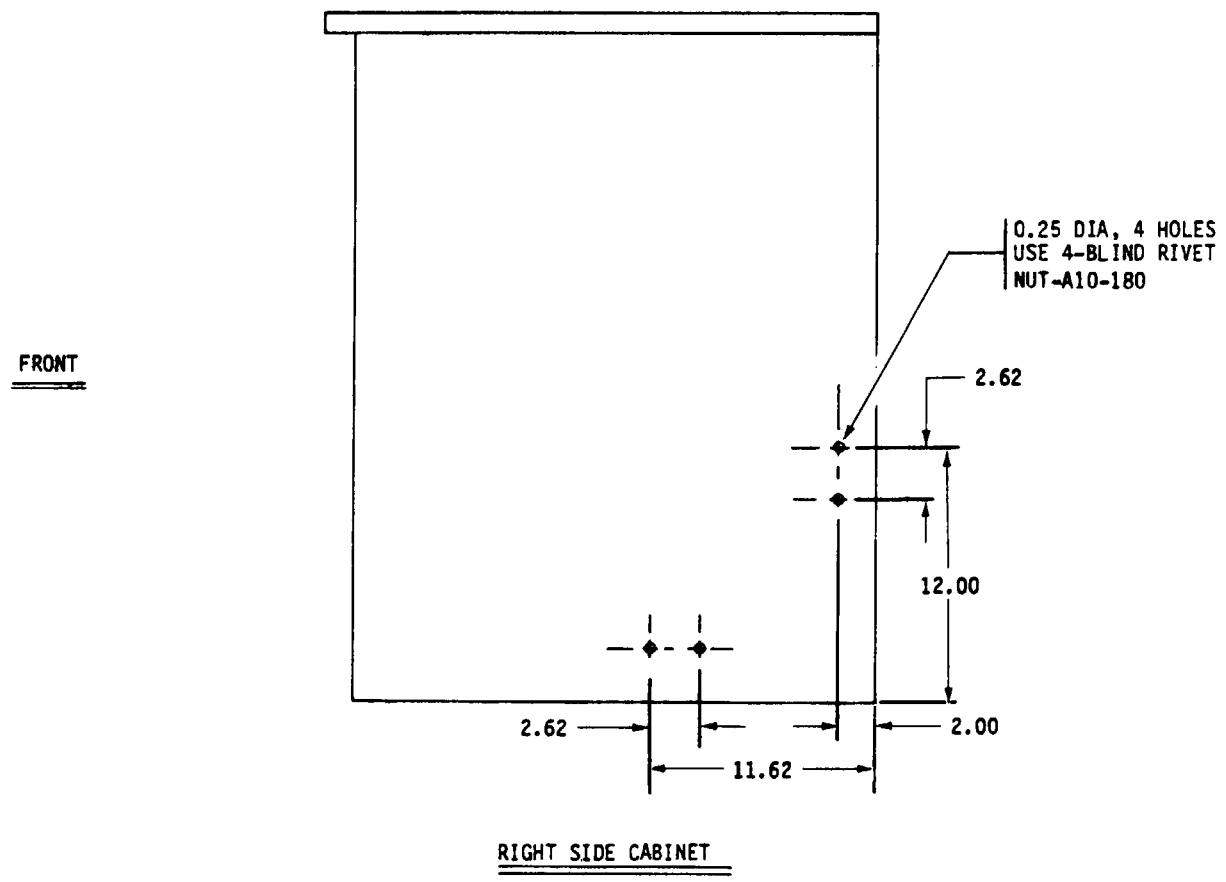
Hole Dimensions for Blind Rivet Nuts, Unit 2, M35A2, Cabinet Side.
